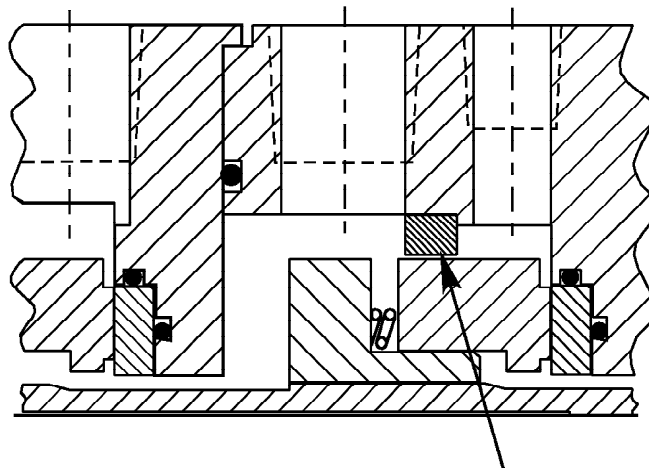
Containment seal chamber bushing for 2CW-CS and 2NC-CS configurations
